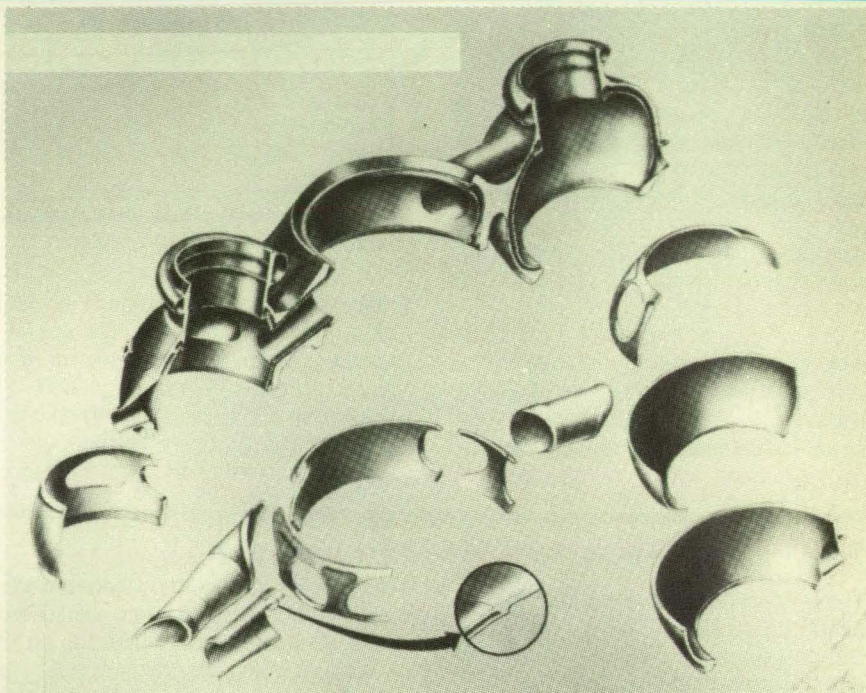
The Manifold Liner is made from smaller pieces that are welded in place inside the manifold.
